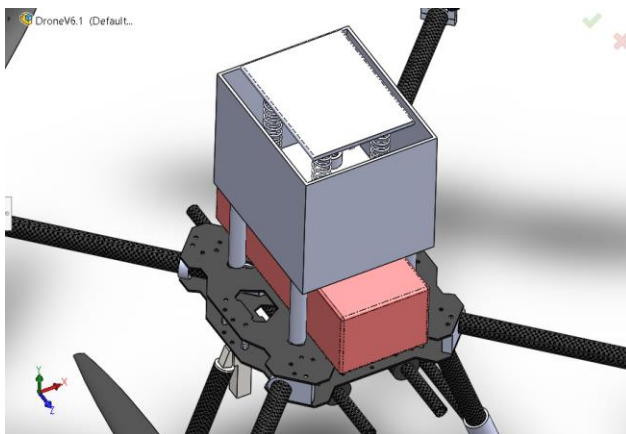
CAD model of our parachute bay installed on top of the battery. The plate used to eject the parachute is spring-loaded and secured with a strap after the parachute is installed.
